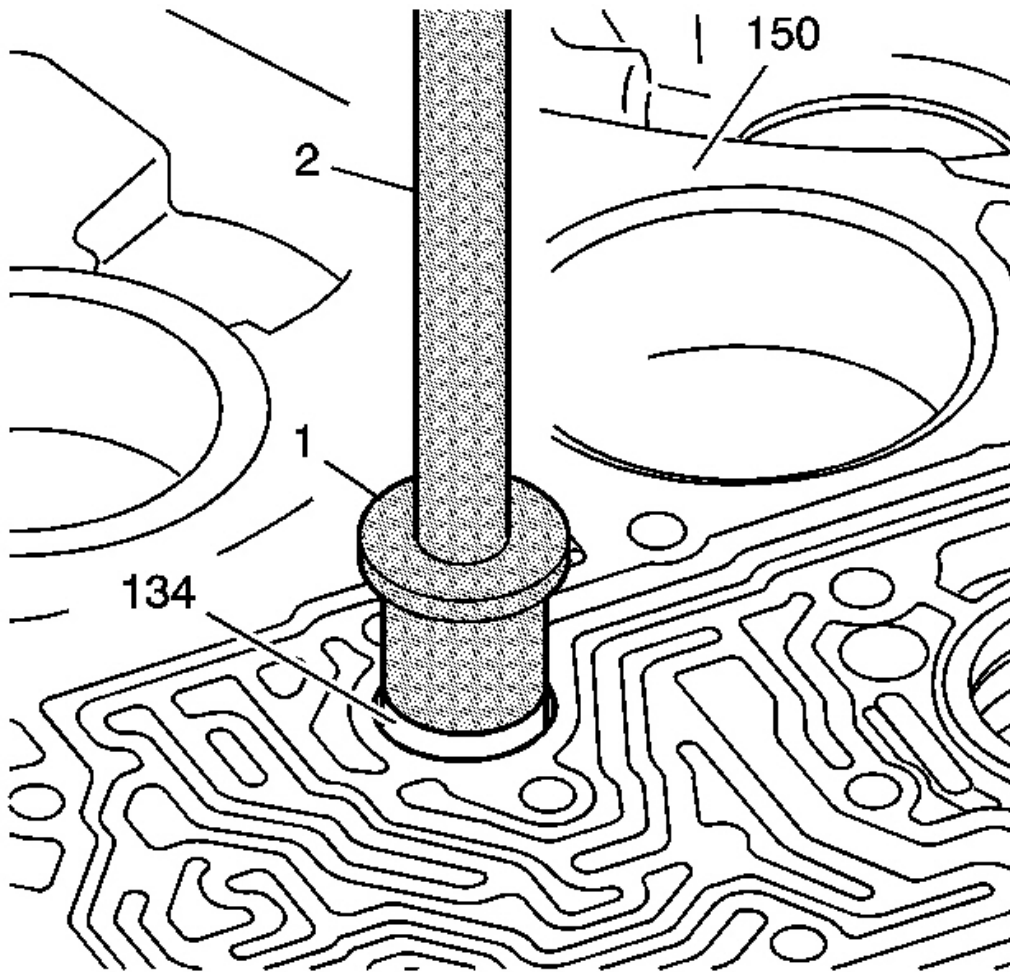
DT 46516, EN 46342 & Park Pawl Actuator Shaft Front Bearing
